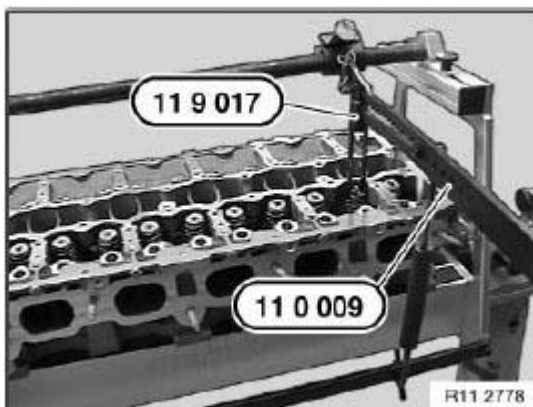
Pressing Valve Spring Down On Spring Retainer With Special Tools (11 0 009) And (11 9 017)
